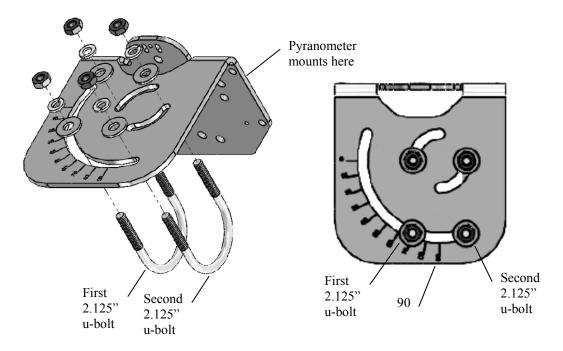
CM245 bracket with 2.125" u-bolts positioned to mount the pyranometer horizontally on a crossarm
